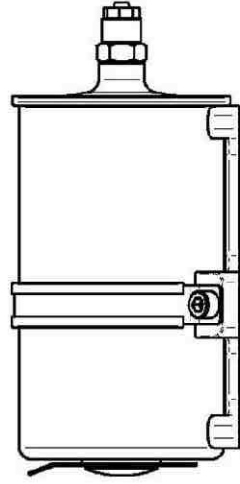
Mounted relubrication unit on the WLUB 120 mounting bracket
